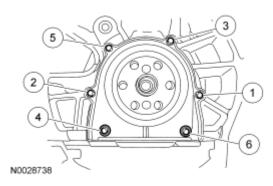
Identifying Tightening Sequence Of Crankshaft Rear Oil Seal Bolts Courtesy of FORD MOTOR CO.
